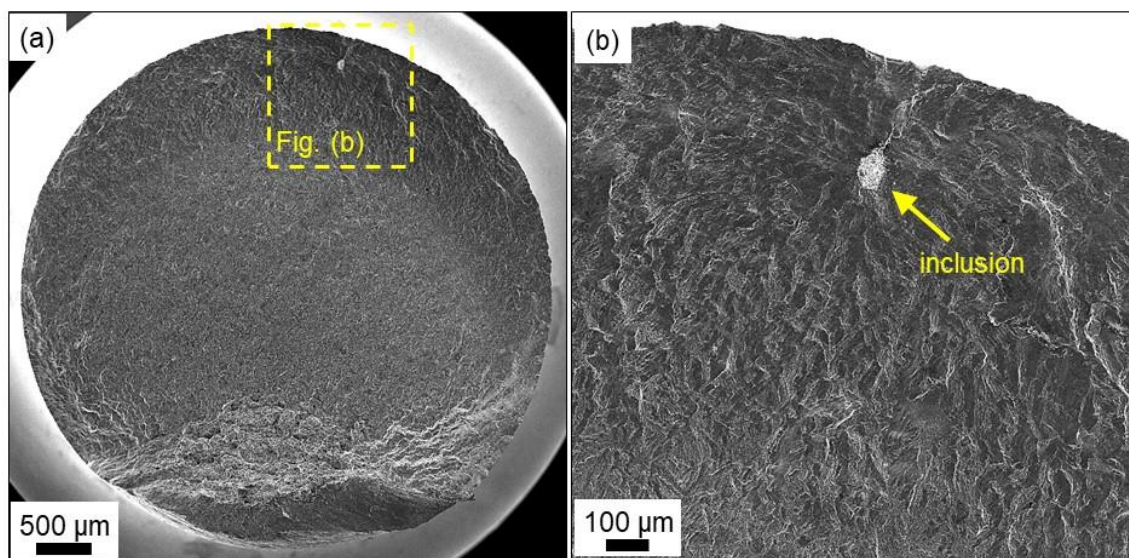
Fracture surface at 400 MPa. (a) Fracture surface and (b) fatigue crack initiation from an internal inclusion.
